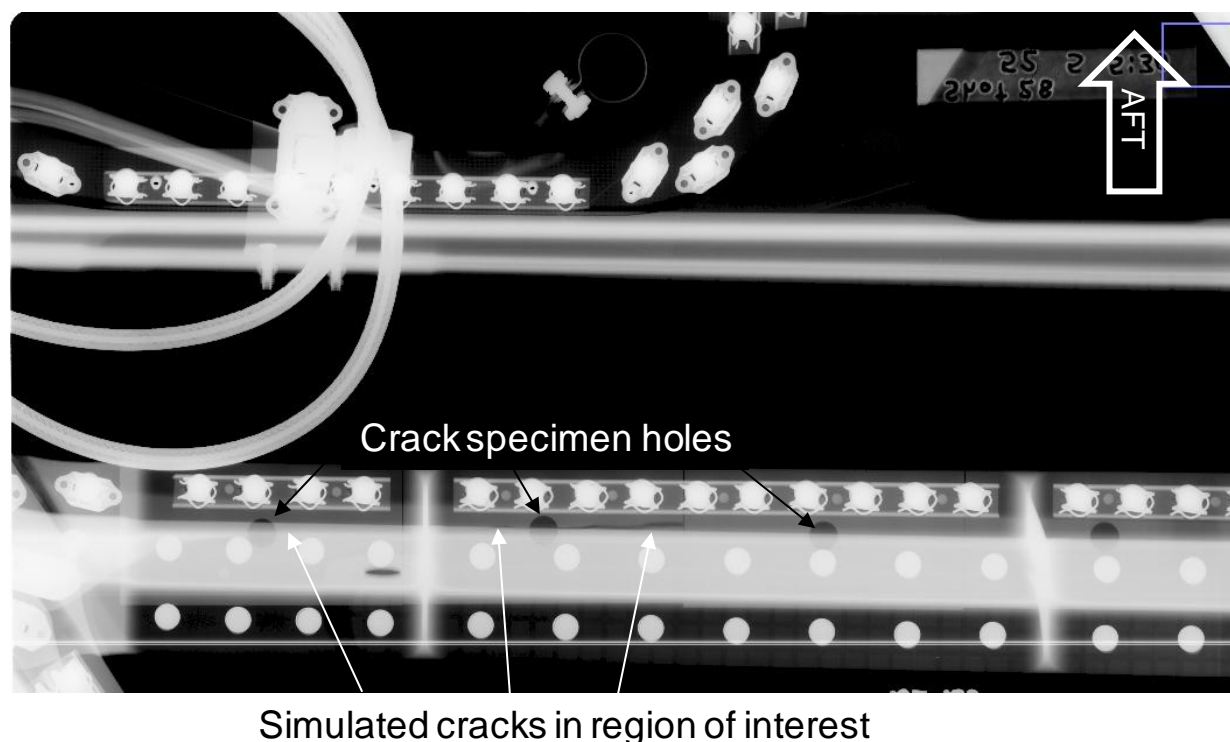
CR image of F-15 Outboard Torque Box Spar On-Wing Testing
